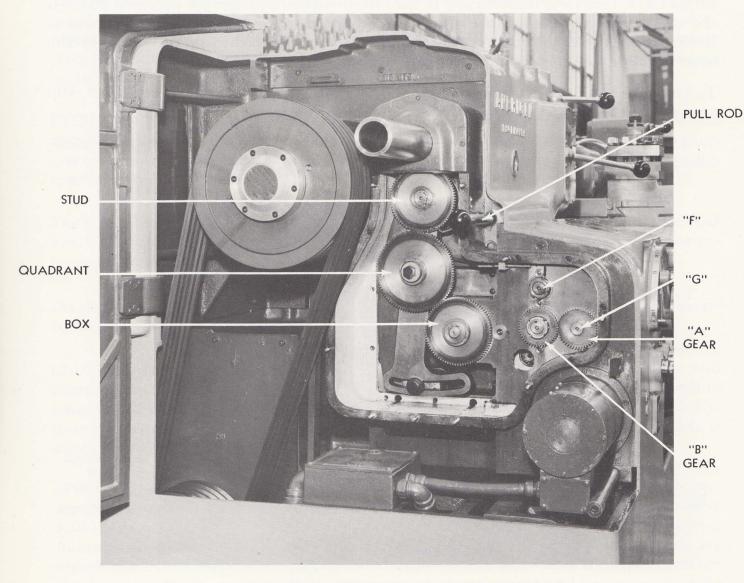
Head-End, showing Swinging Cover open and oil tight aluminum cover removed.
